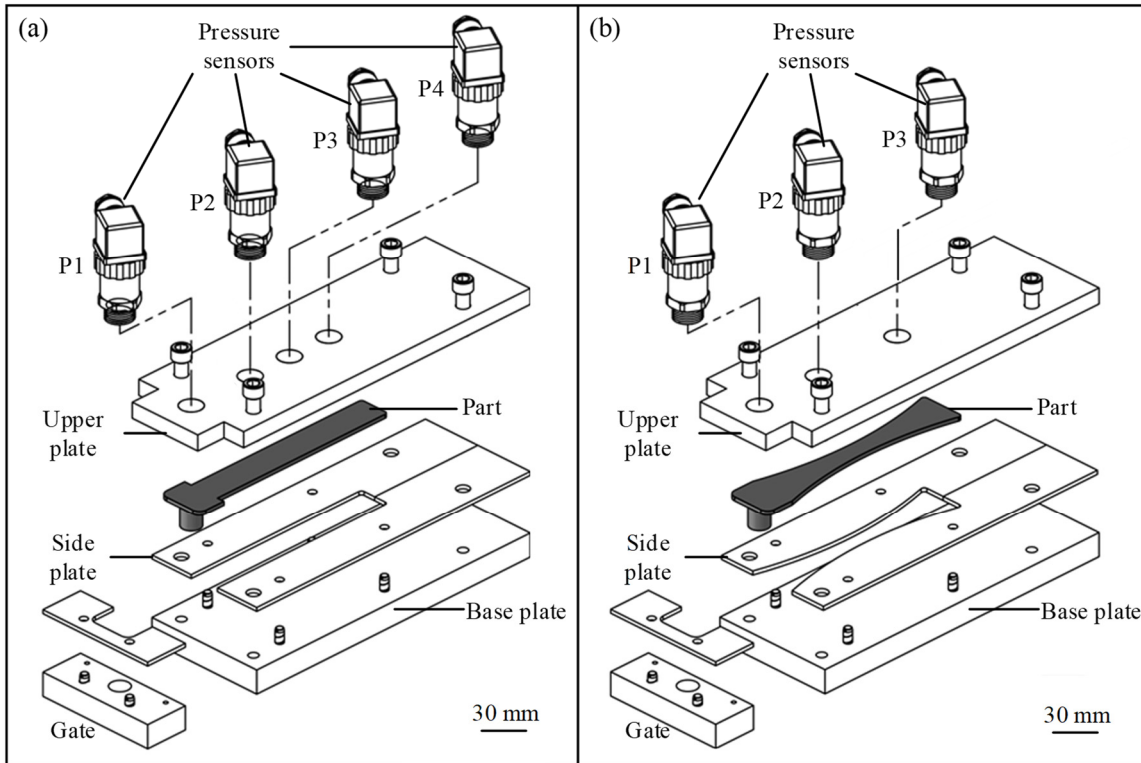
Exploded view of the (a) rectangular, and (b) hourglass mold cavities showing the location of the pressure sensors
